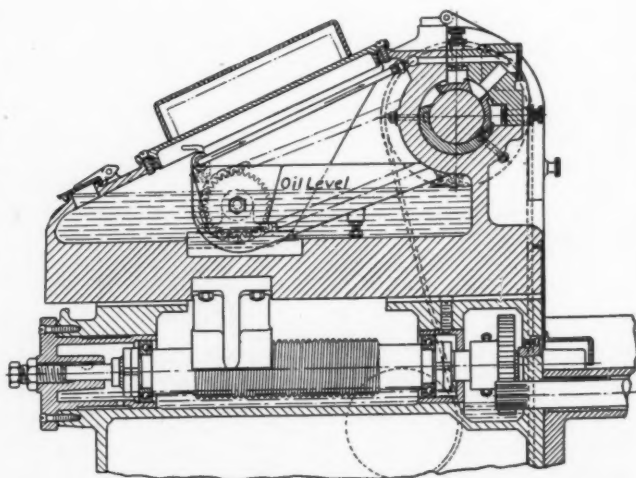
Wheel side of grinding machine spindle case. Oil is pumped to bearings and returned to the sump
